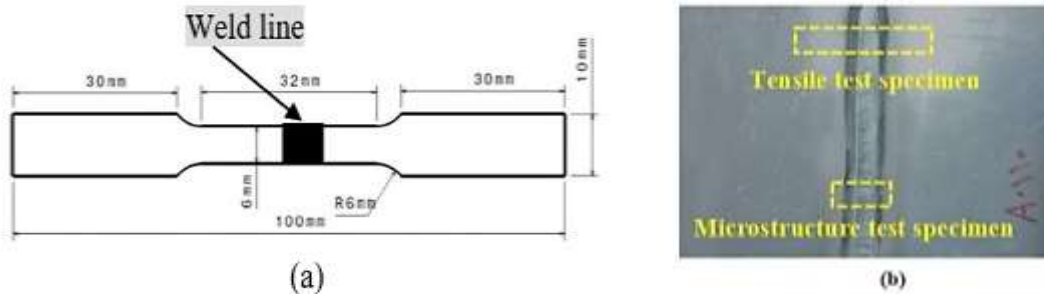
Test specimens: (a): The tensile specimen geometry and dimensions, and (b): Positions of the test specimens.
